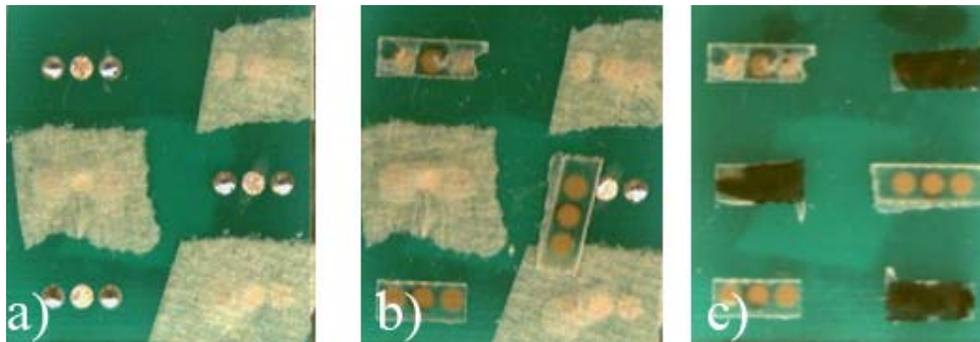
a) Initial substrate with solder applied, b) Assembly of bare parts. One part not completely assembled, c) Black parts assembled and final bare part assembled
